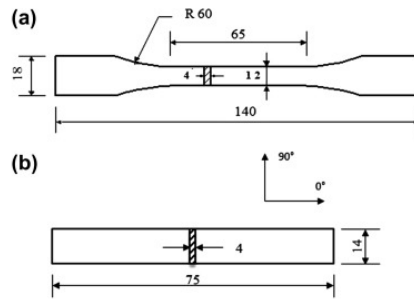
Specimen's geometry (dimensions in mm): (a) tension and (b) bending.
